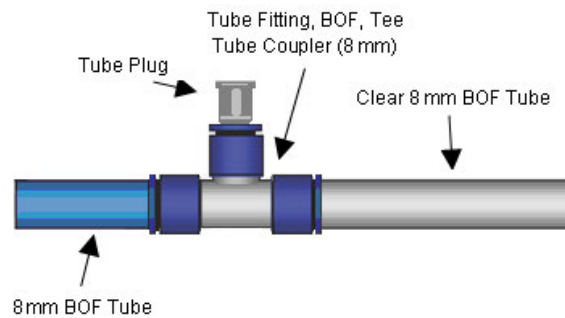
L1-1. BOF tee tube coupler with clear BOF tube.
